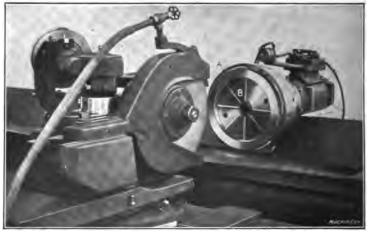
Grinding Side of Steel Ring which is held by a Magnetic Chuck
